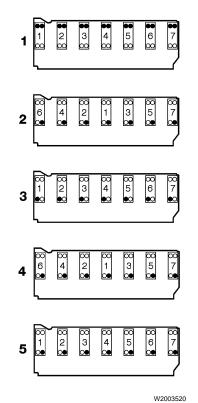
Bearing caps and camshaft/rocker shaft, tightening sequence Gradually tighten the bolts so that the rocker arm shaft does not bend or warp (also check that the guide pins fit correctly in the camshaft supports). Tighten the shaft until it lies against the camshaft lobes, then torquetighten using the proper bolt sequence (see Fig. 2: Bearing caps and camshaft/rocker shaft, tightening sequence, page 7) and the following 5-step process:
